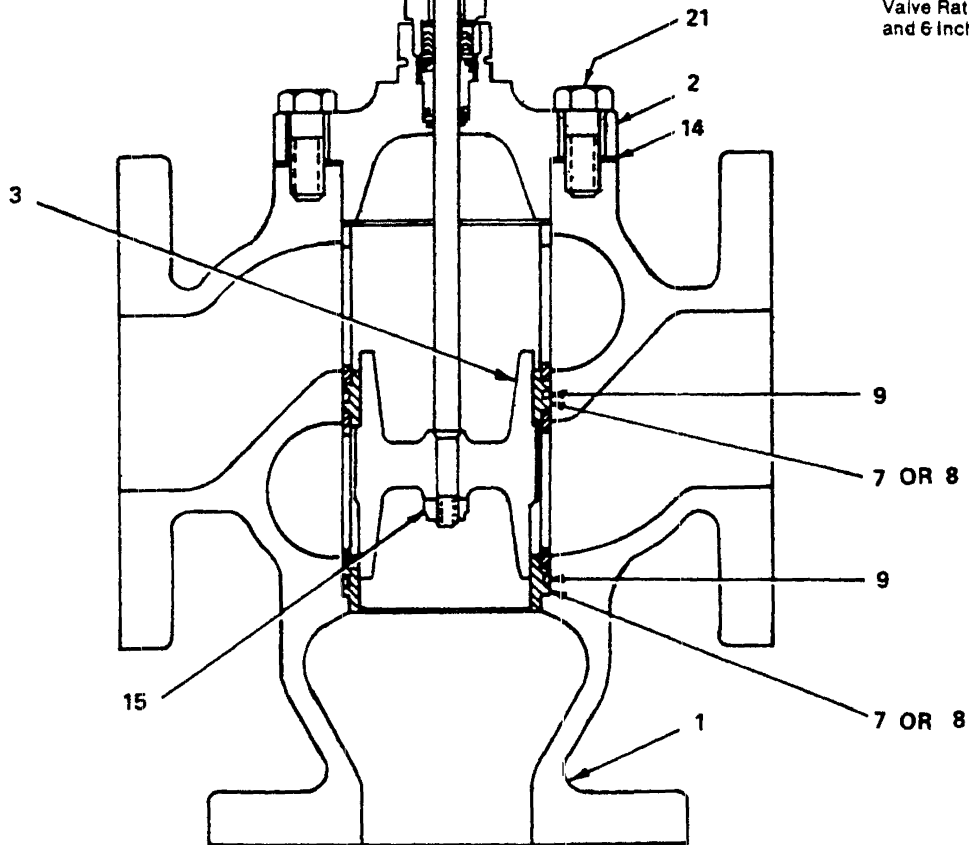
Typical Valve Body Arrangement for Series 8600 and 8900 Valves for Mixing Valves
